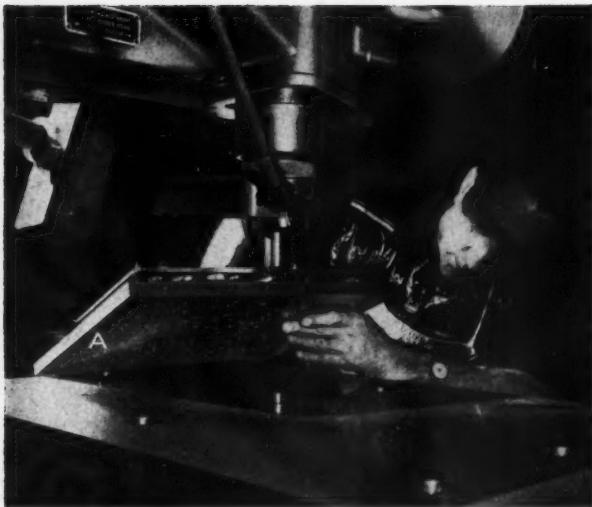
View showing the bored fixture plate *A*, and the location pin in the auxiliary table
